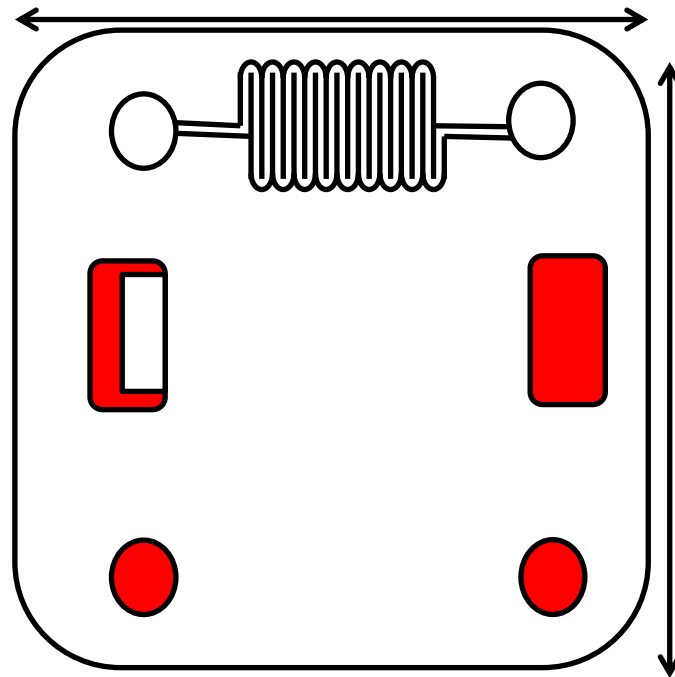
Test injection mould layout, red areas are through holes used for leak testing
